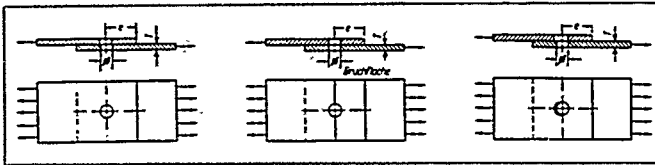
Failure modes of riveted joints under static loading, left: shear failure of the rivet shank; middle: tensile failure of the component material; right: hole wall failure or distortion in the component material
